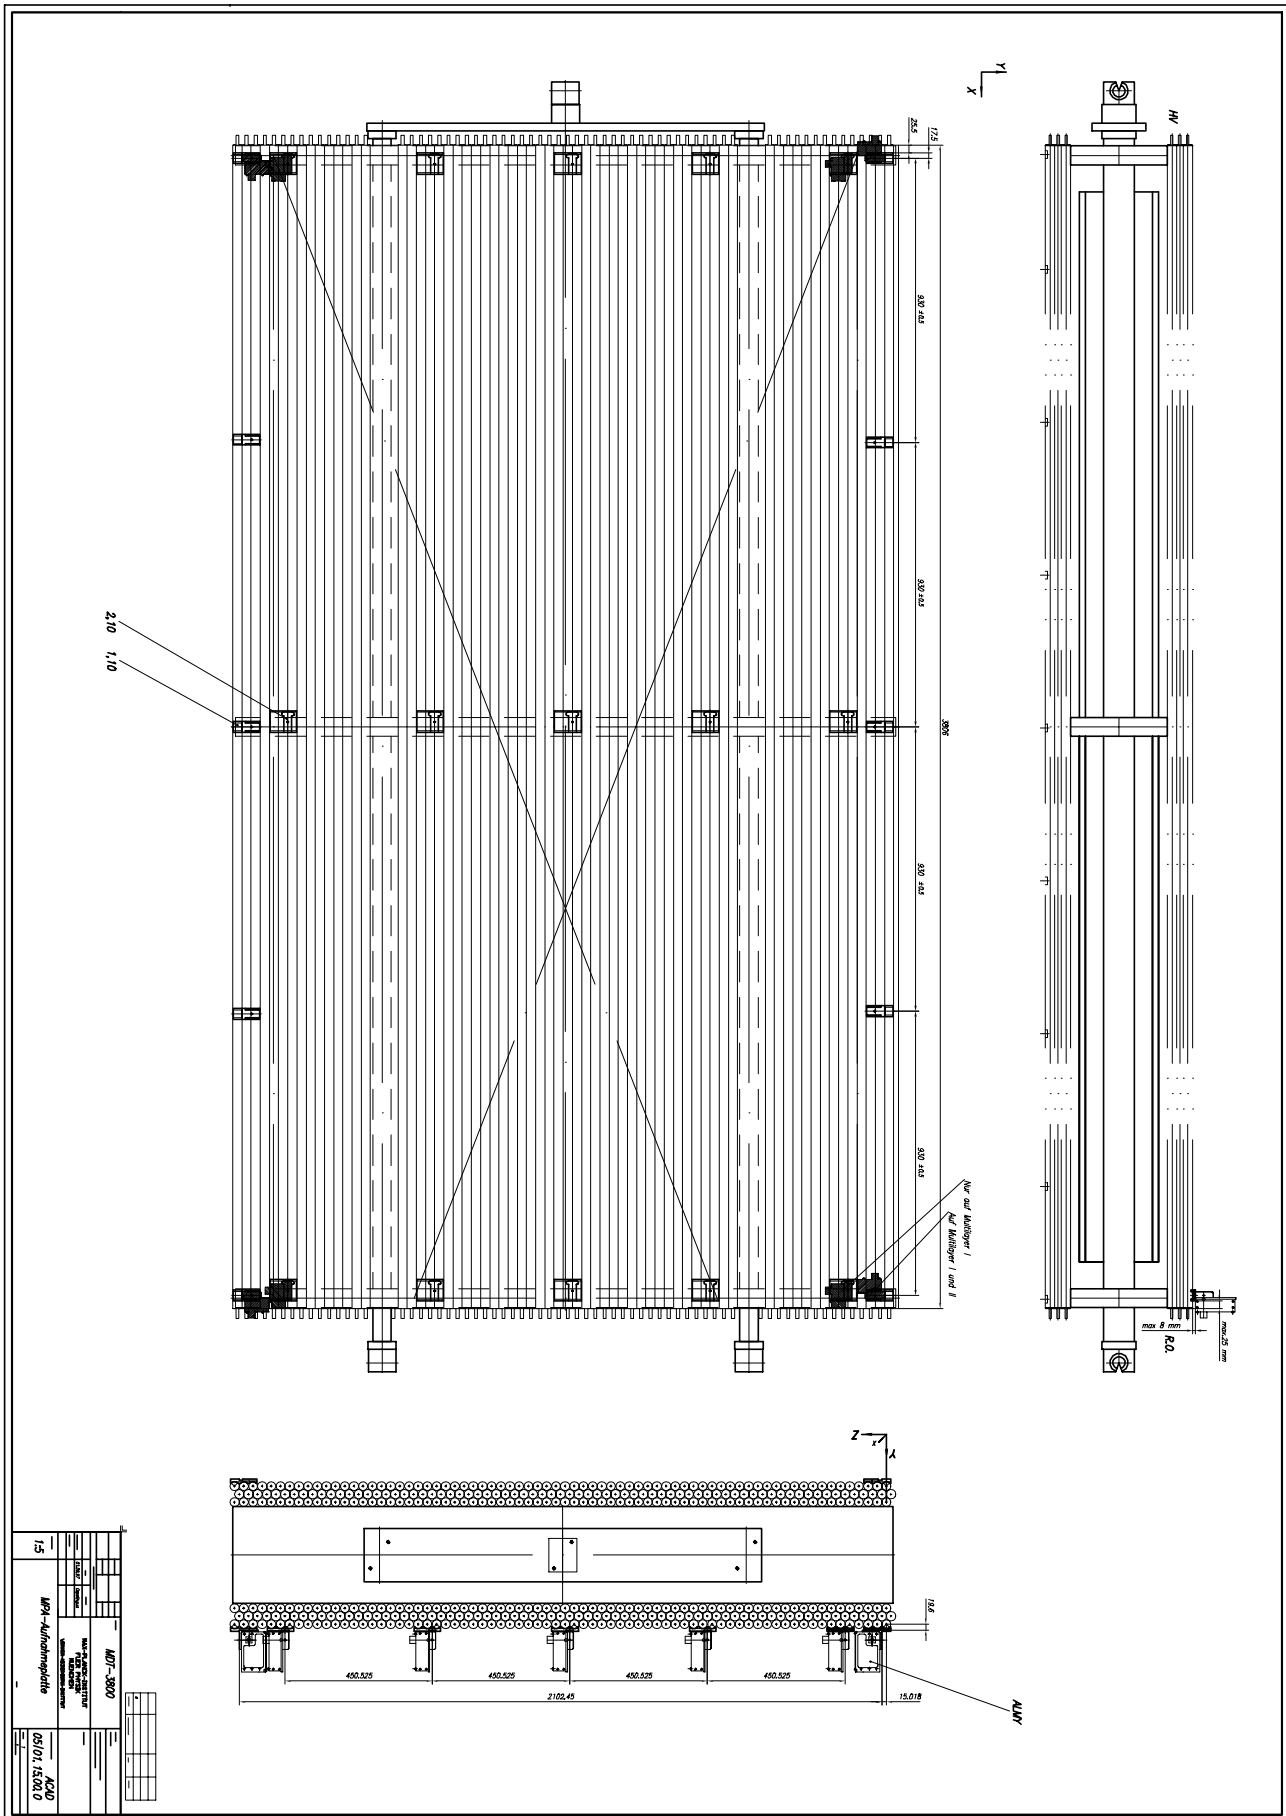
Dimensions of the BOS prototype chamber. The locations of mounting plates for alignment sensors (MPA-ALMY sensors) are indicated.
